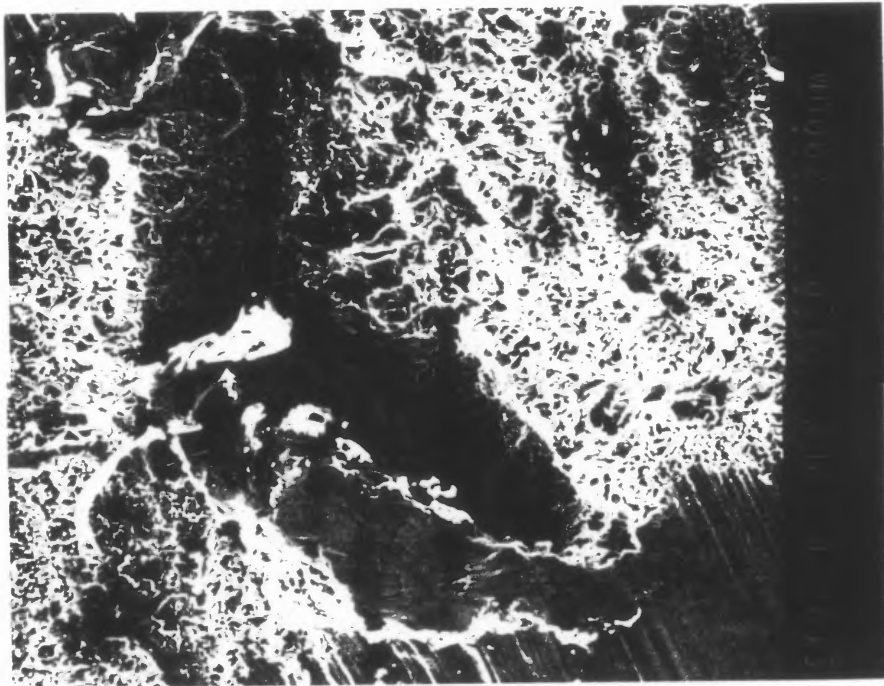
Sample 1 Aluminum plate under WJ cutting.
